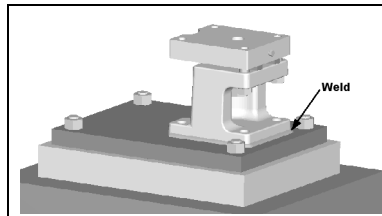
WELDING ON MOUNTING PLATE
